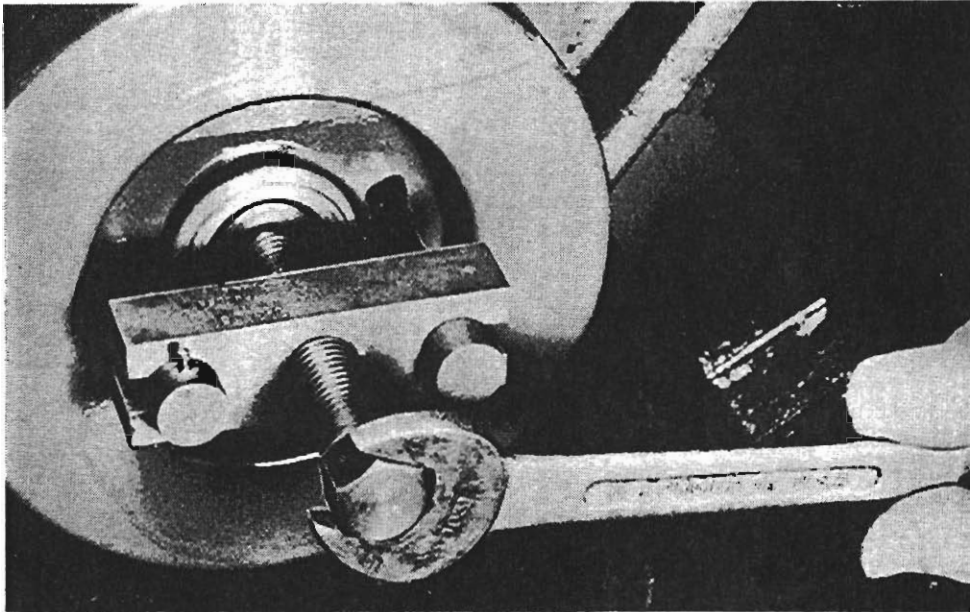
Vibration Damper Puller J-2636 Is Used to Remove Fluid Suspension Type Dampers.
